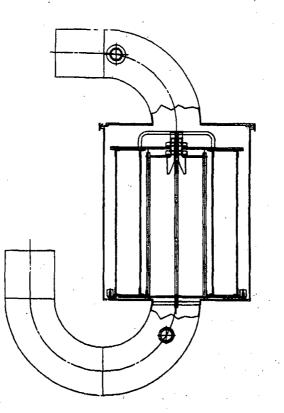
Schematic of cylindrical carbon filter cartridge mounted in a housing.
